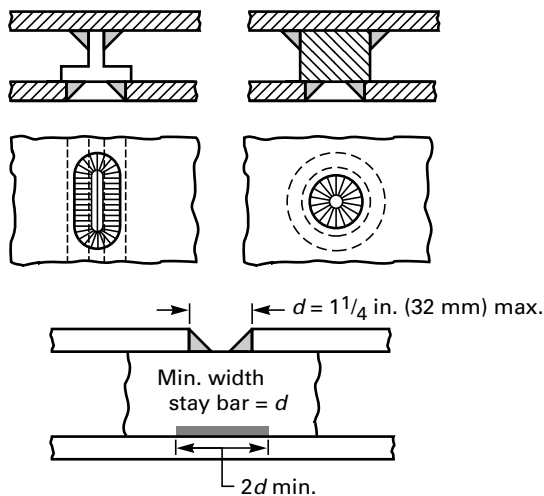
USE OF PLUG AND SLOT WELDS FOR STAYING PLATES
